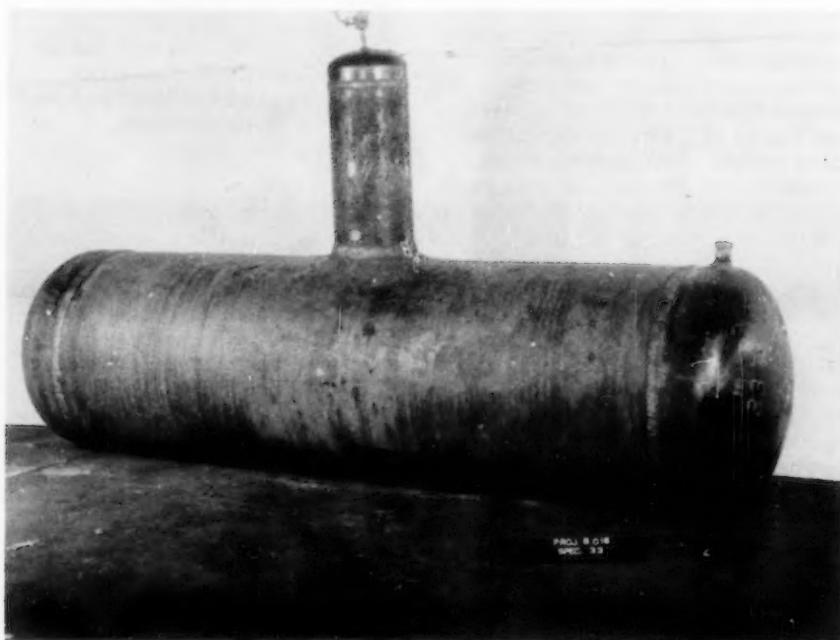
Failure in Manifold Welding Fitting.
